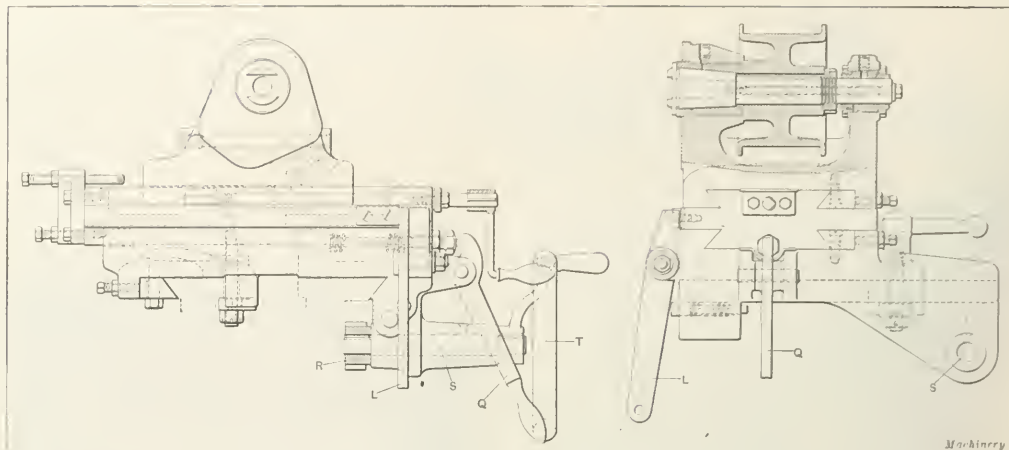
Partial Cross-sectional View and End View of Cutter-head
